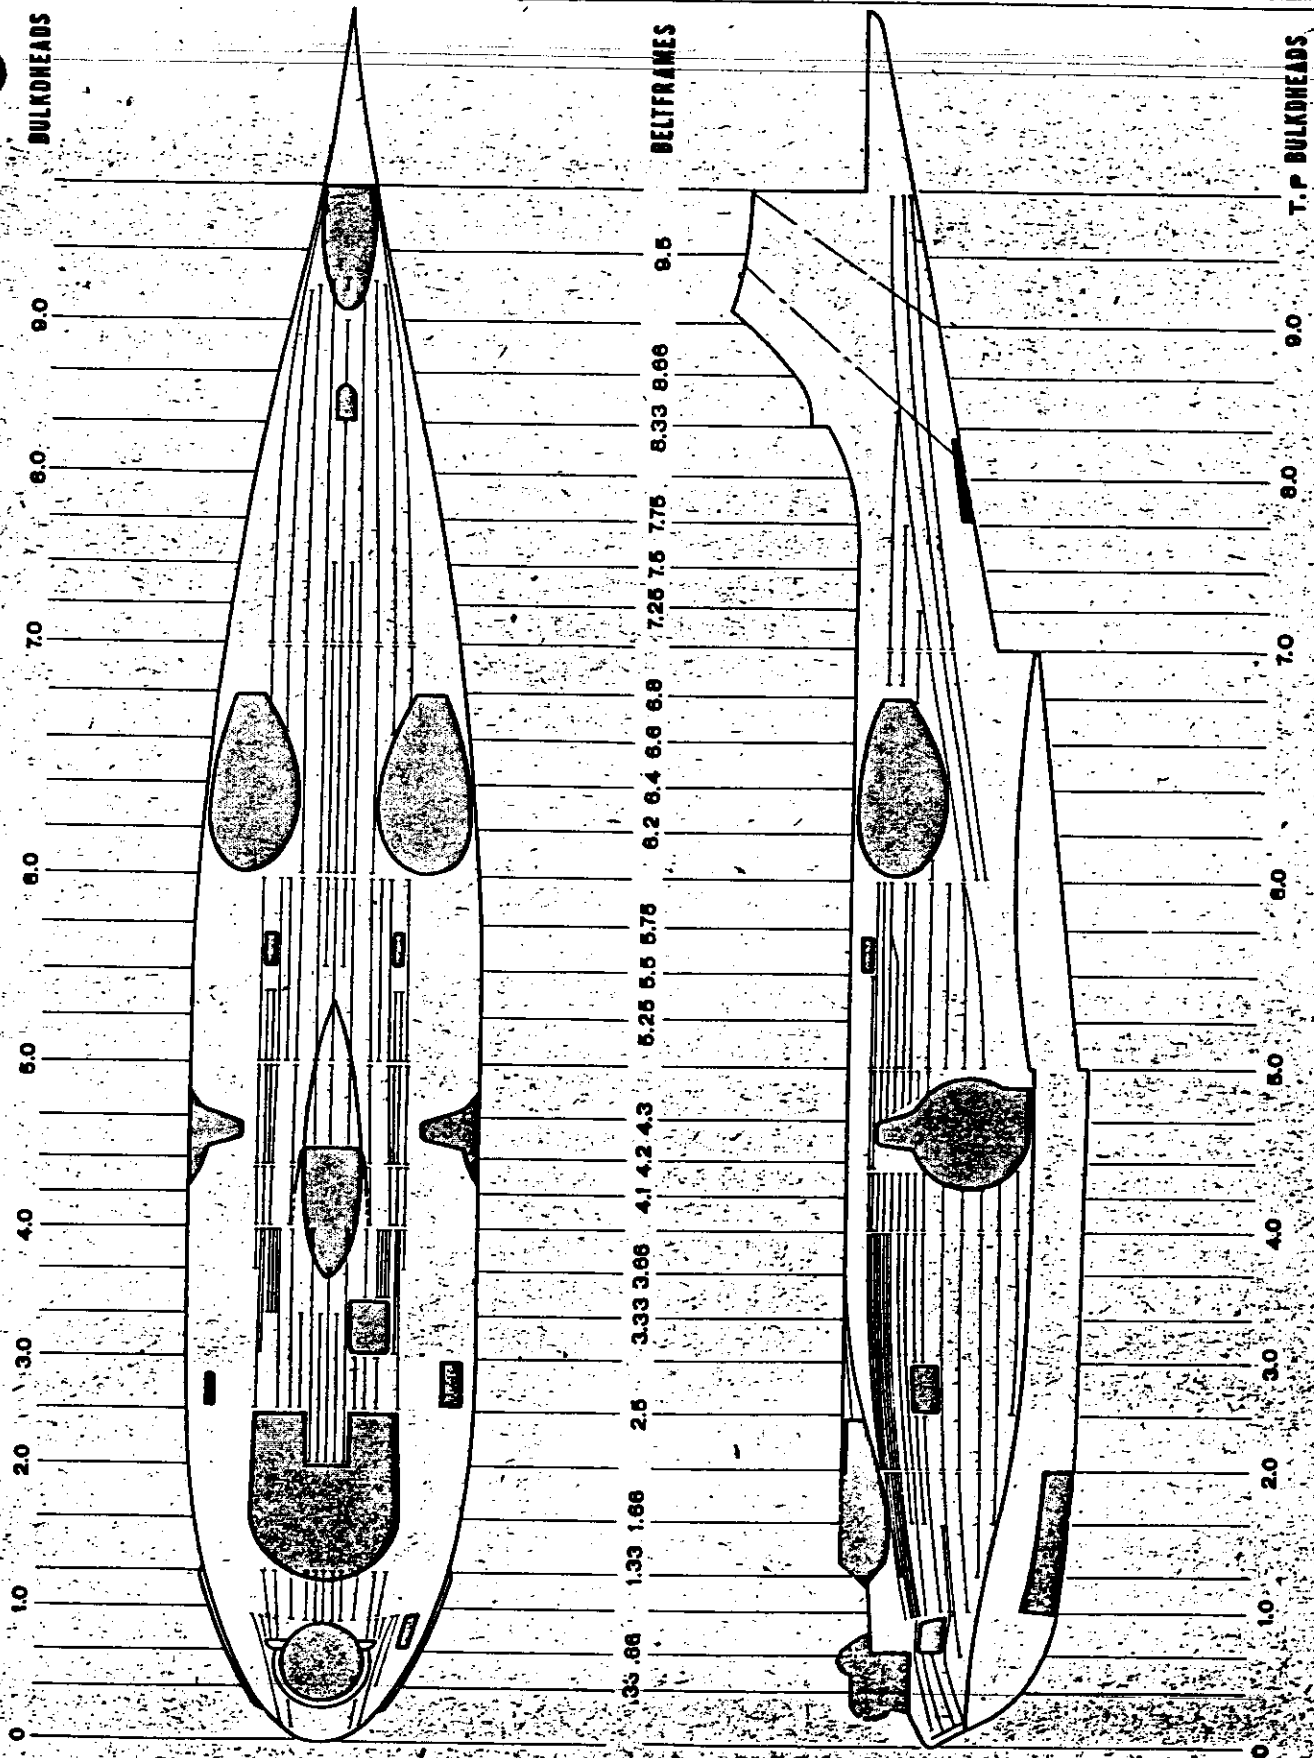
Hull Stringer Diagram (sheet 1 of 2)
